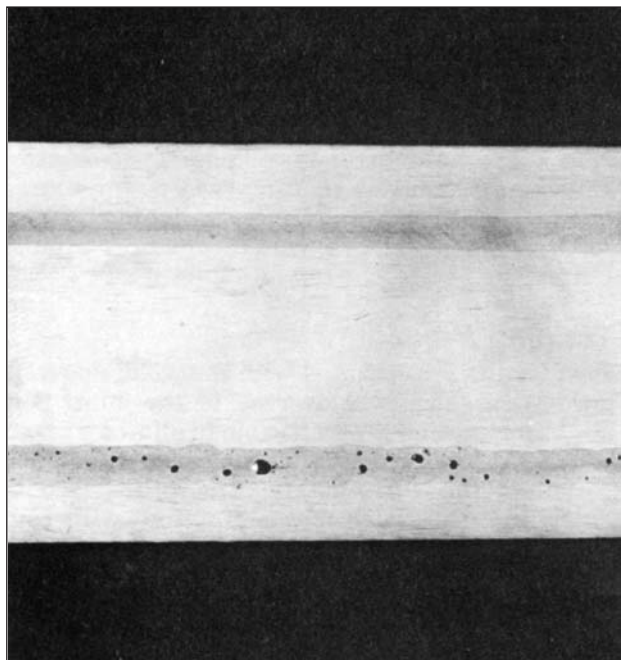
Effect of arc length on soundness of welds in MONEL alloy 400. Top weld made with correct 0.050 in. (1.27 mm), arc length. Bottom weld made excessive, 0.150 in. (3.81 mm), arc length.
